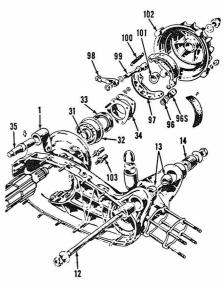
Exploded view of the rear brake assembly and engine front pivot mount.
